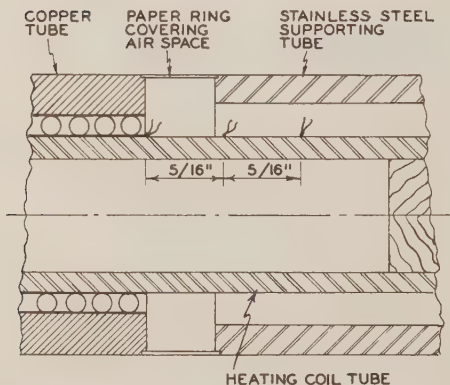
LOCATION OF THERMOCOUPLE ON HEATING COIL TUBE
